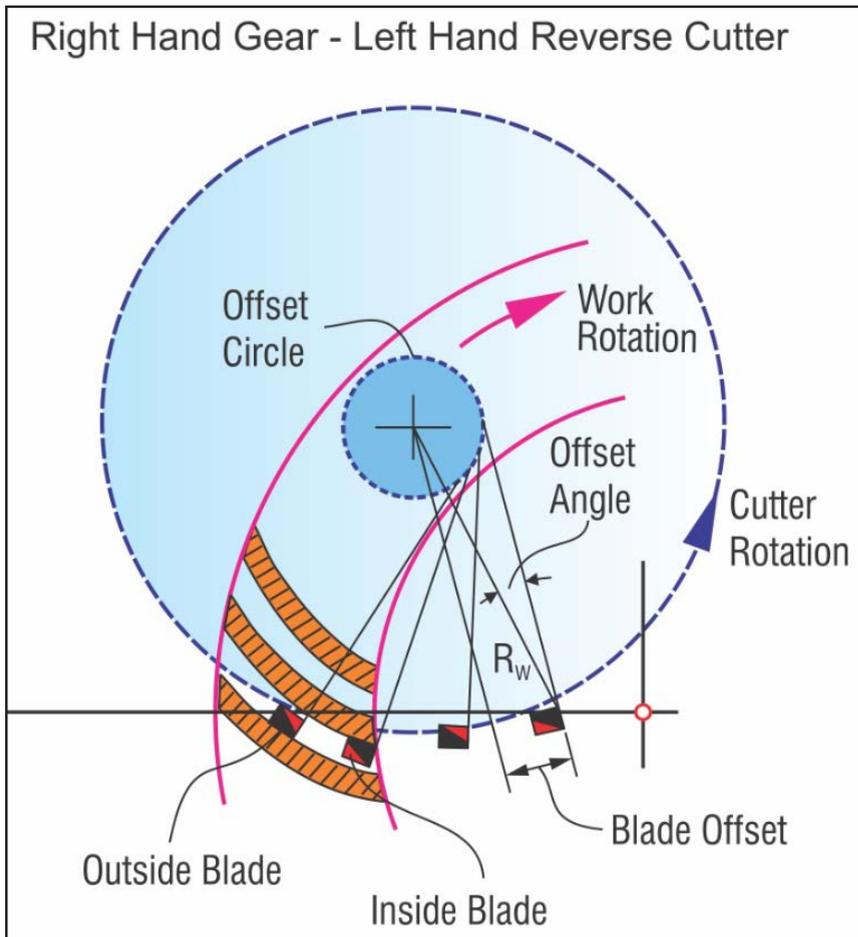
Face hobbing, right-hand gear with left-hand reverse cutter head.
